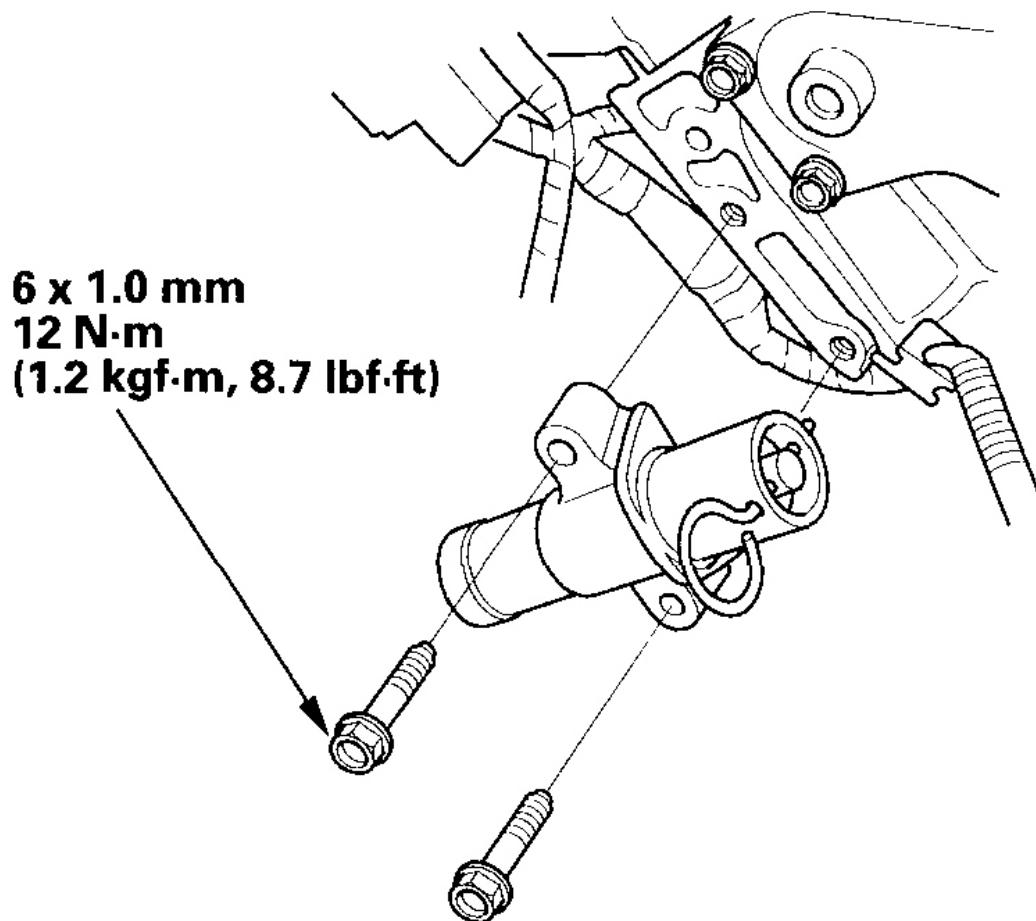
Aligning Holes On Rod And Housing Of Auto-Tensioner
